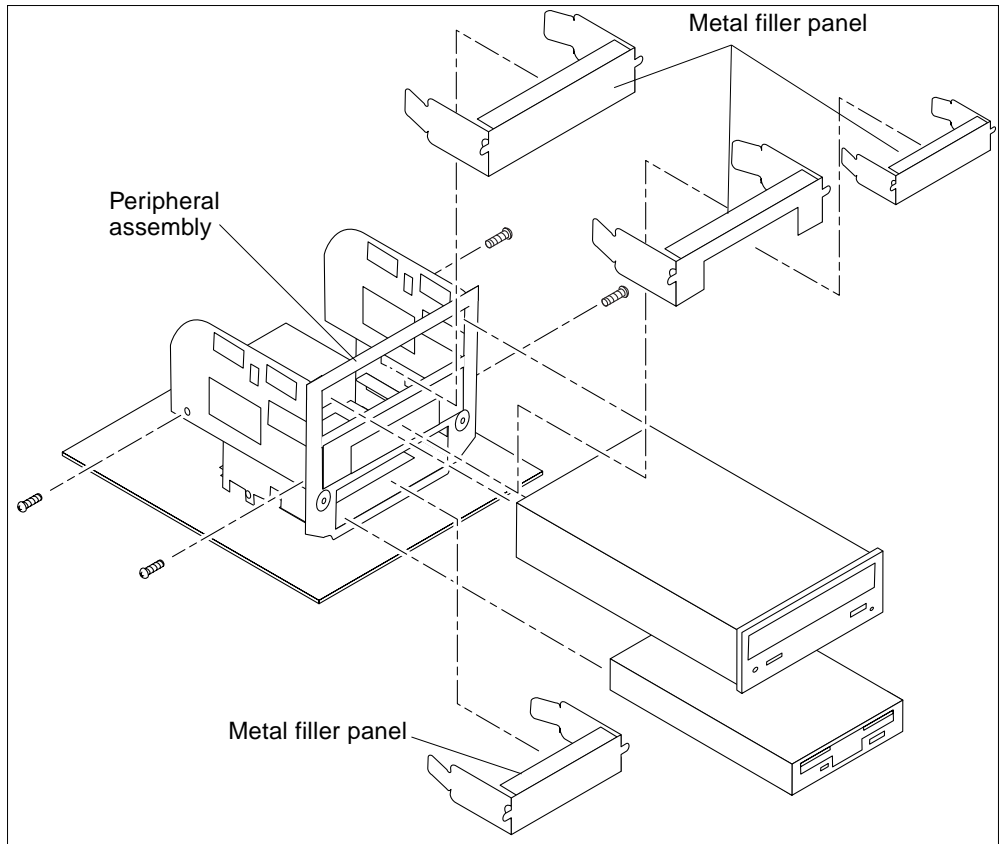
Removing and Replacing Metal Filler Panels
